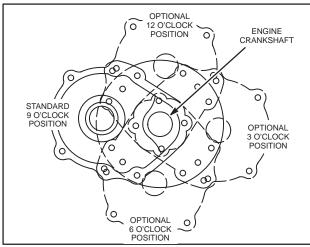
POSITIONING GEAR CASE ASSEMBLY
